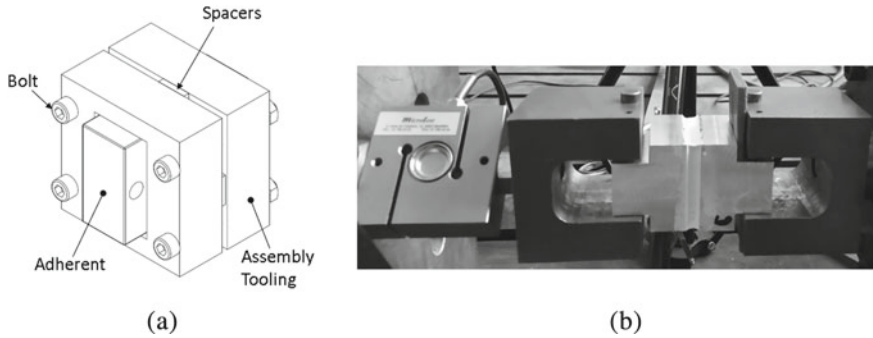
Tensile joint fabrication tooling (a), test equipment (b)
